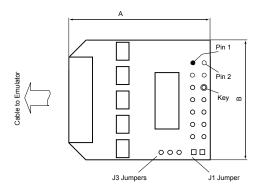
The dimensions of the 20-pin ADA-ISO-TI14-E probe. Top view. A = 32.4 mm (1.28 in), B = 28.5 mm (1.12 in).
